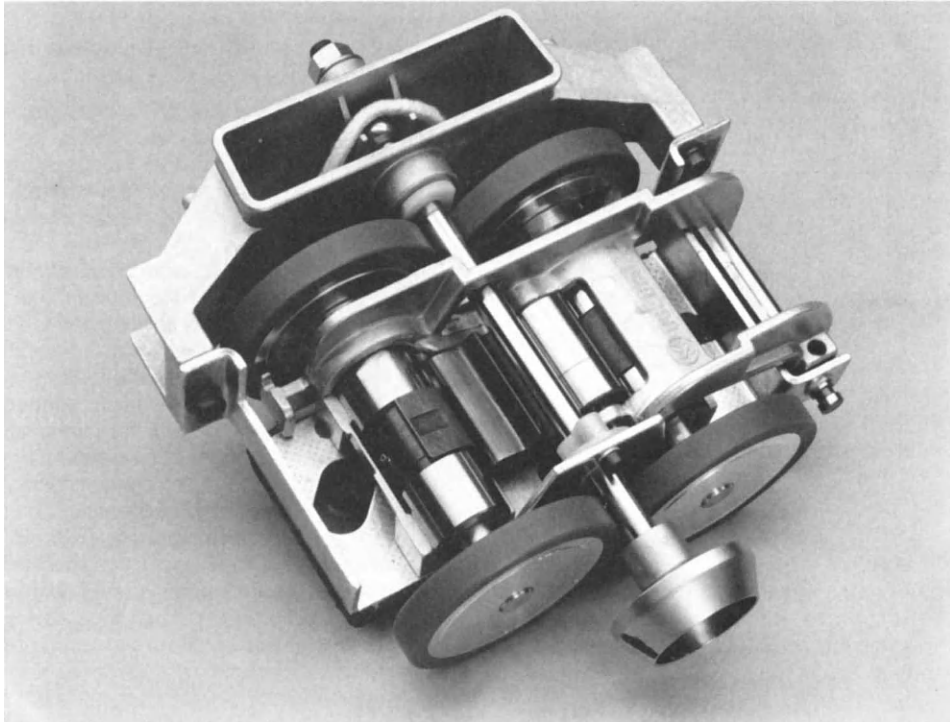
Disc-on-roller rotor bearing unit. Although this system permits rotor speeds up to 80 000 rev/min, the roller bearings themselves rotate at a much slower speed, thereby providing a long working life. It also makes for easy and quick exchange of the rotor size. Courtesy of Schubert & Salzer A.G.
